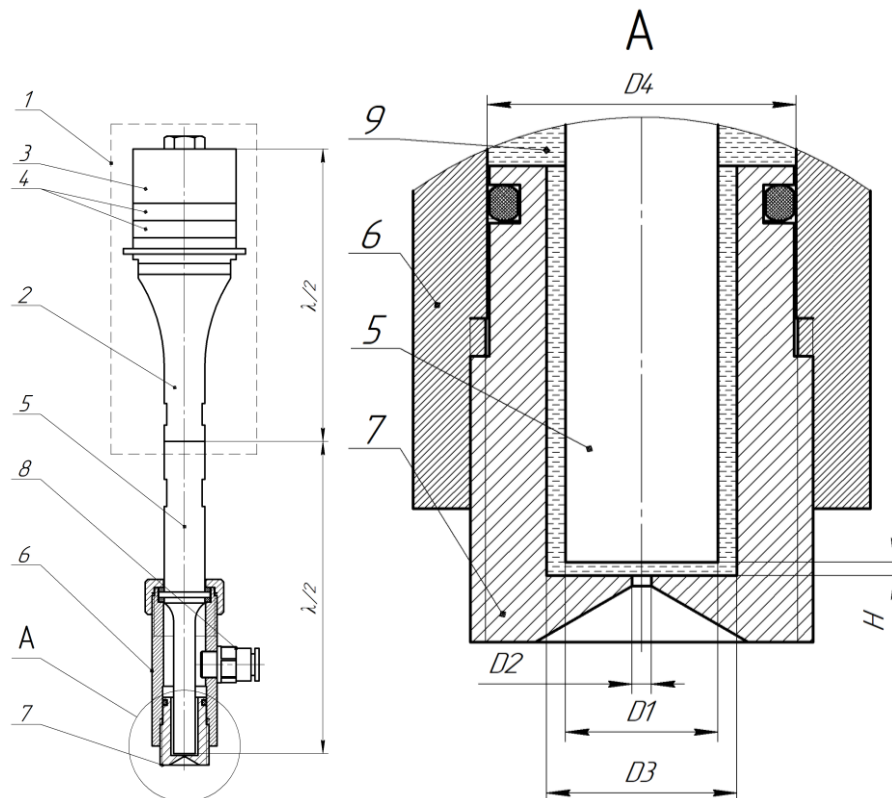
Sketch of an ultrasonic nebulizer: 1 – piezoelectric Langevin transducer; 2 – emitting concentrator pad; 3 – reflective pad; 4 – piezoceramic elements; 5 – working tool; 6 – technological volume; 7 – jet; 8 – fitting; 9 – sprayed liquid; D1 – diameter of the end of the working tool; D2 – nozzle hole diameter; D3 – internal diameter of the technological volume in the end zone of the working tool; D4 – internal diameter of the technological volume.
